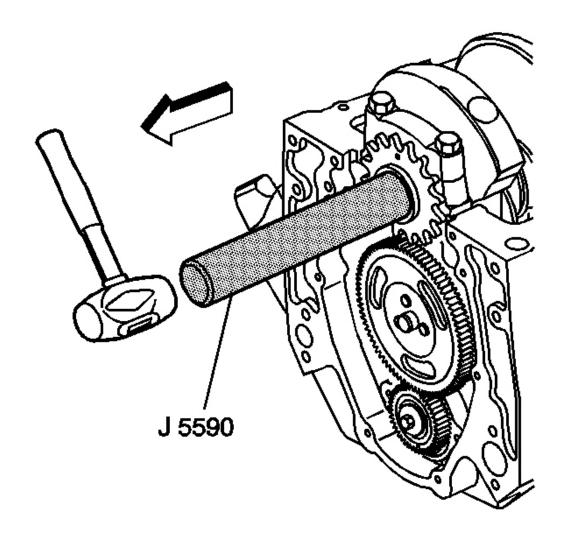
Installing Crankshaft Sprocket Using J 5590 Courtesy of GENERAL MOTORS CORP.
